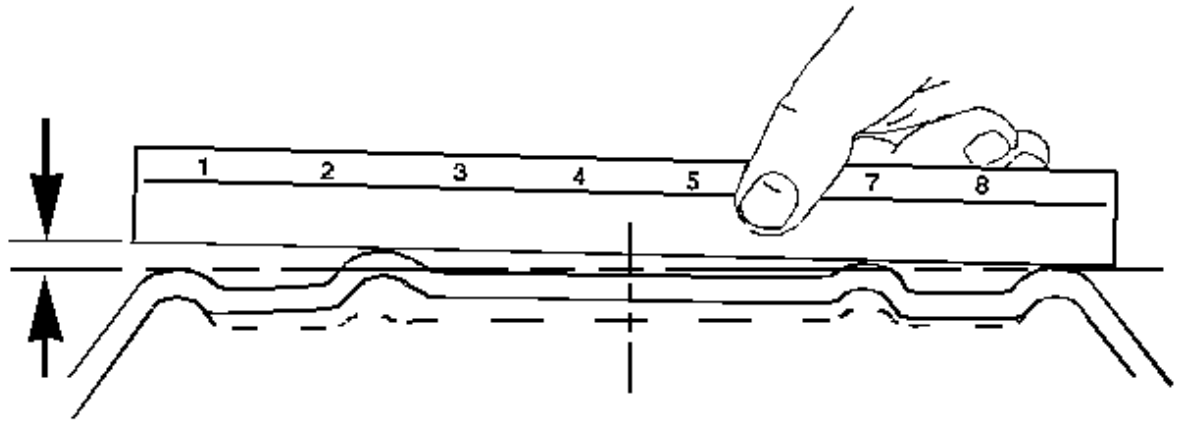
Inspecting Wheel Inboard Mounting Surface
